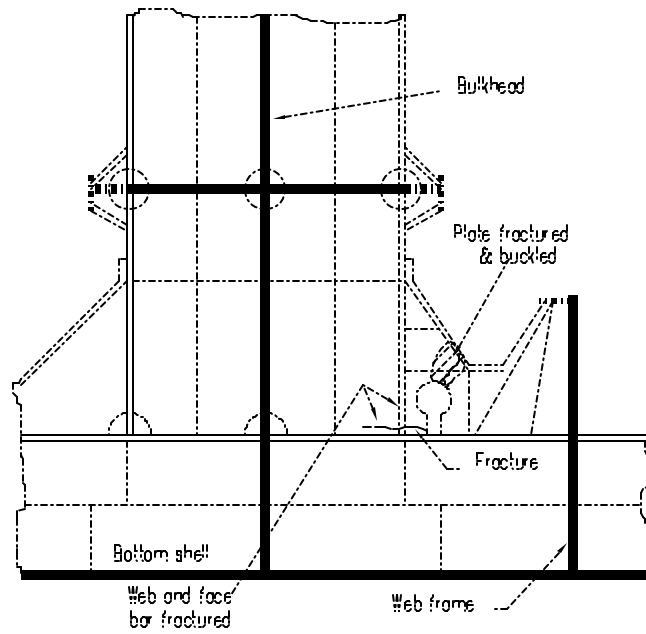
Fractured and buckled buttress in way of bracket connection to O.T. bulkhead.
